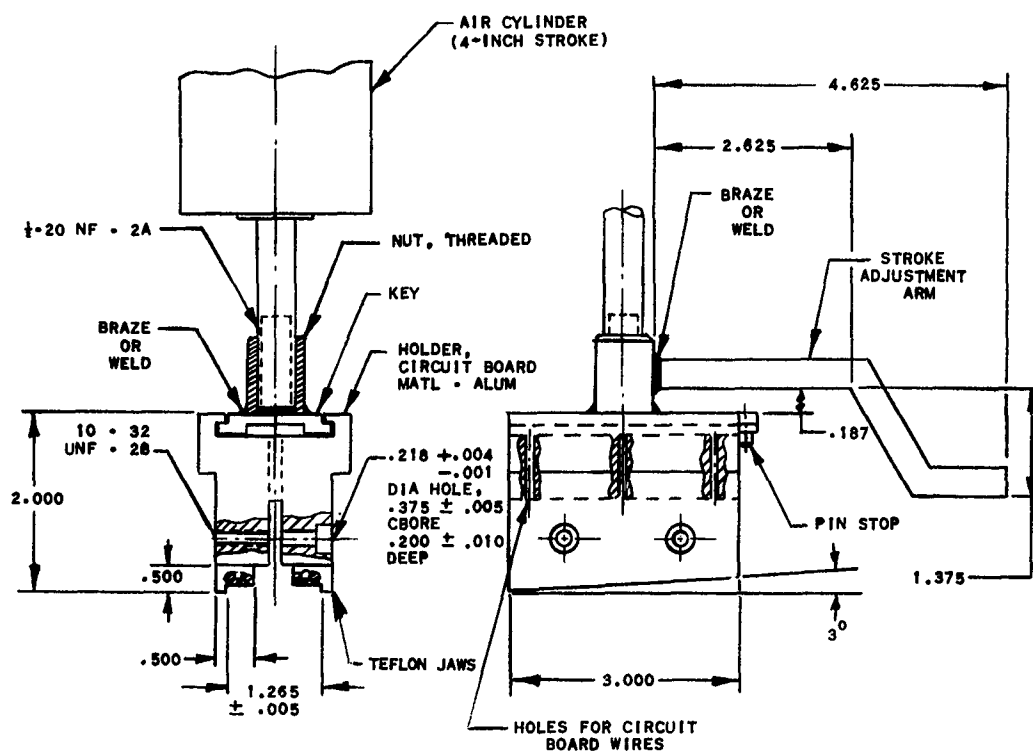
DIP SOLDERING EQUIPMENT (AIR PISTON IN UP POSITION)
